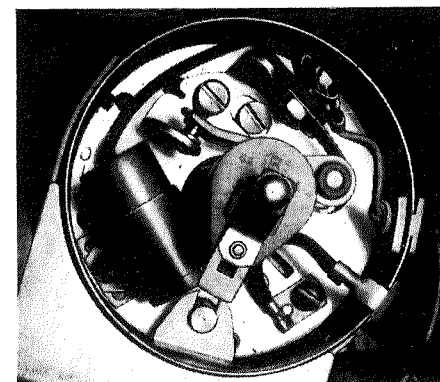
Distributor rotor arm position at T.D.C. firing on No. 1 cylinder
